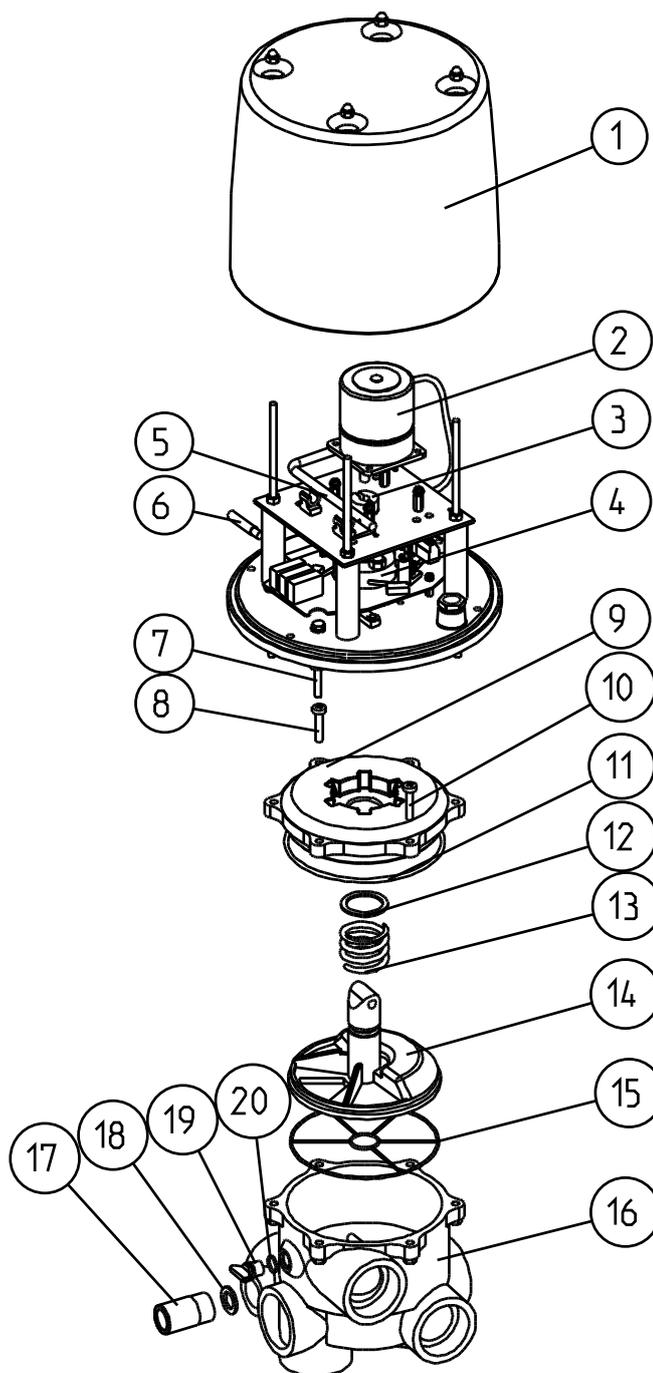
Exploded view of F 500/610 A automatic multi-way valve with automatic actuator
